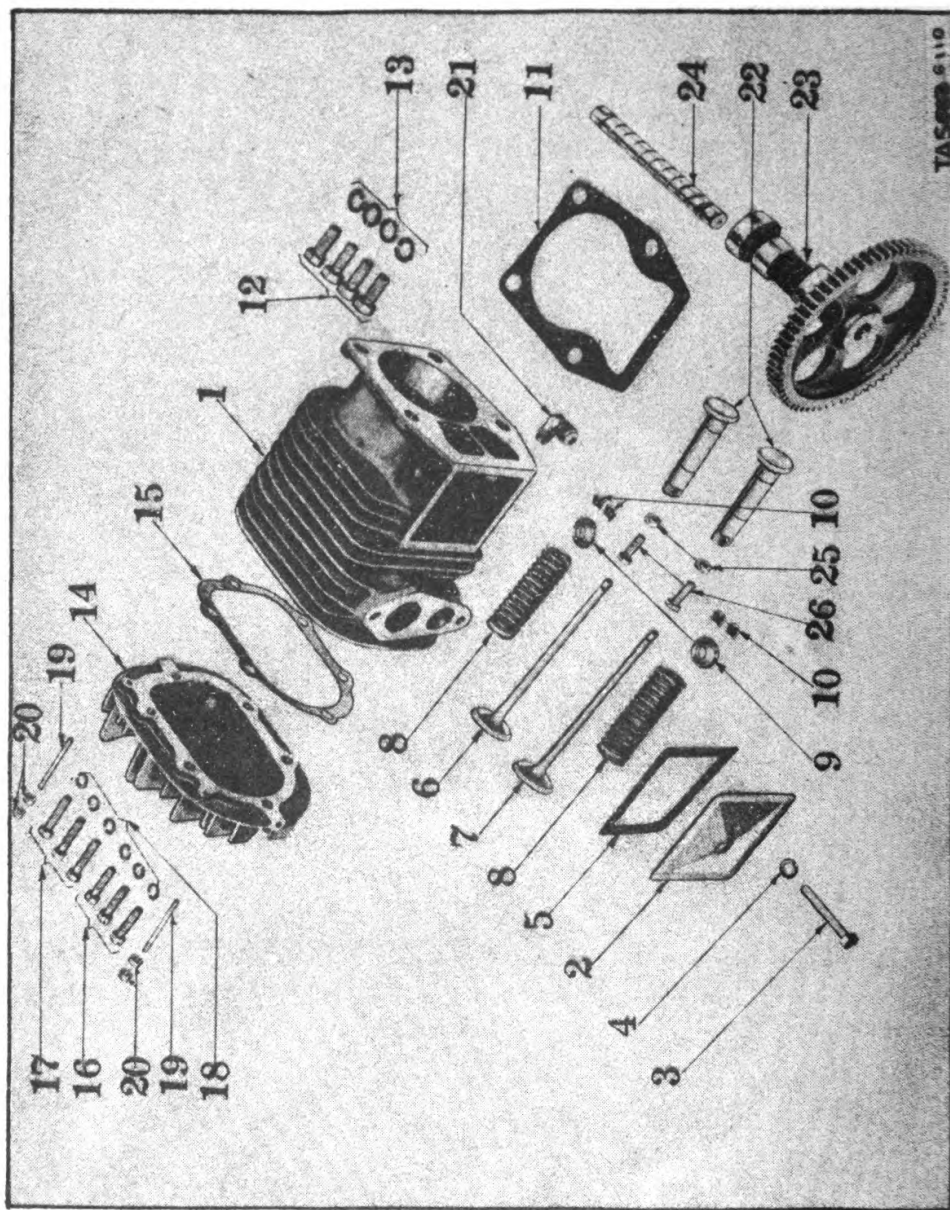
Engine Cylinder, Valves, Tappers, and Camshaft.
